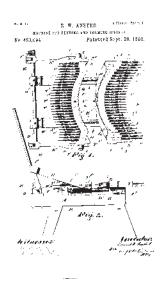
Machine for Bending and Forming Springs. An early example of a Mechanically Reconfigurable Mold
